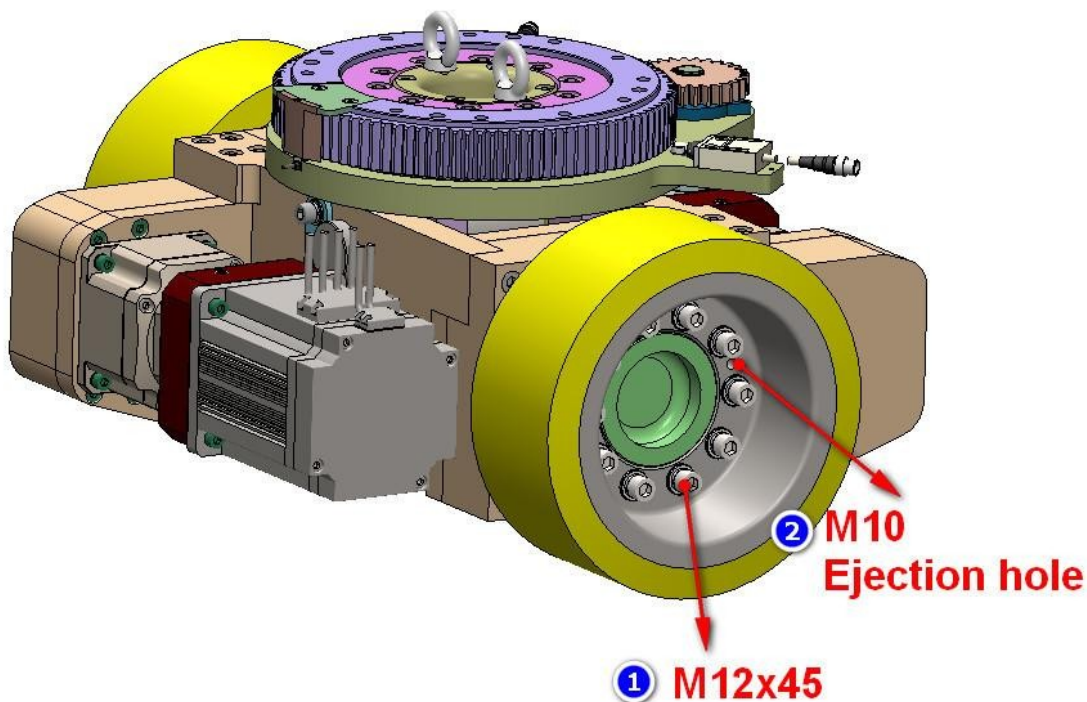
Tyre removal points: M12x45 wheel fastener and M10 extraction hole.
